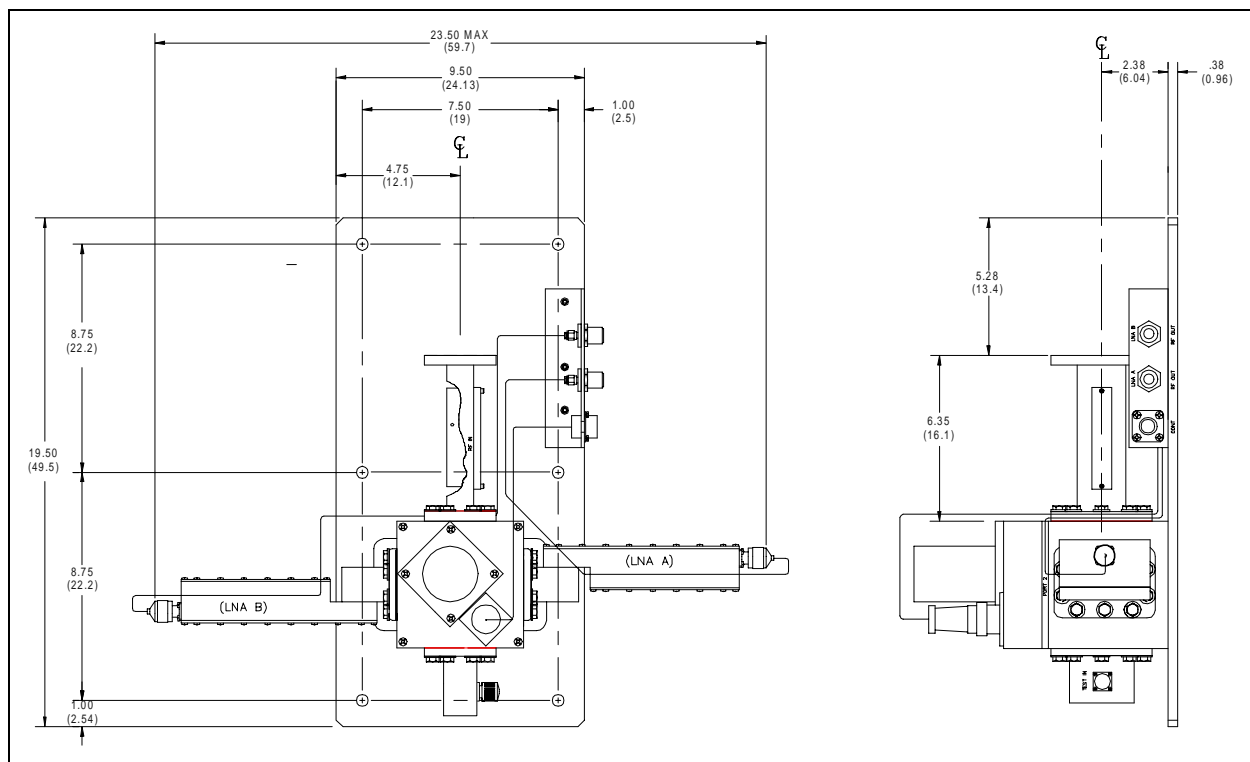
Dimensions for 1:1 Redundant LNA Plate
